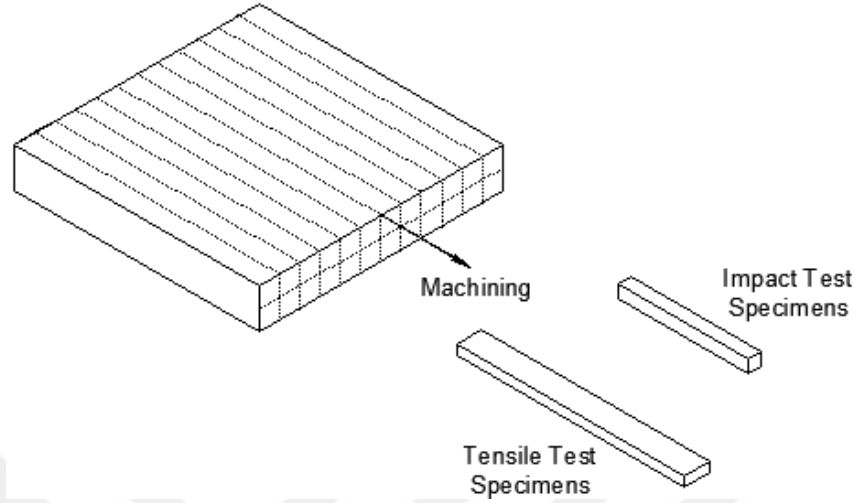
Specimen cutting scheme of specimens (second stage)
